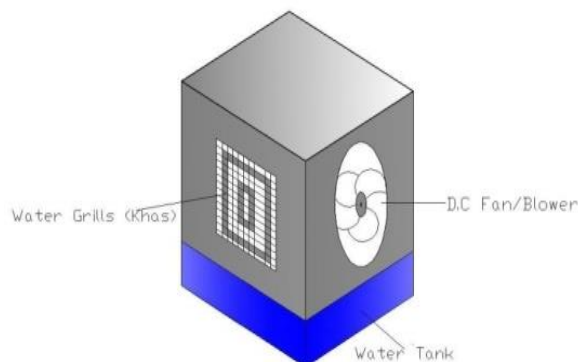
Assembling drawing of the solar powered evaporative air cooler
